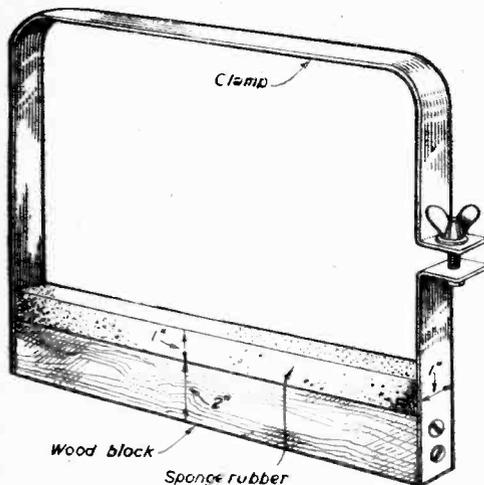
Ideal mounting arrangement for rectangular tubes.
